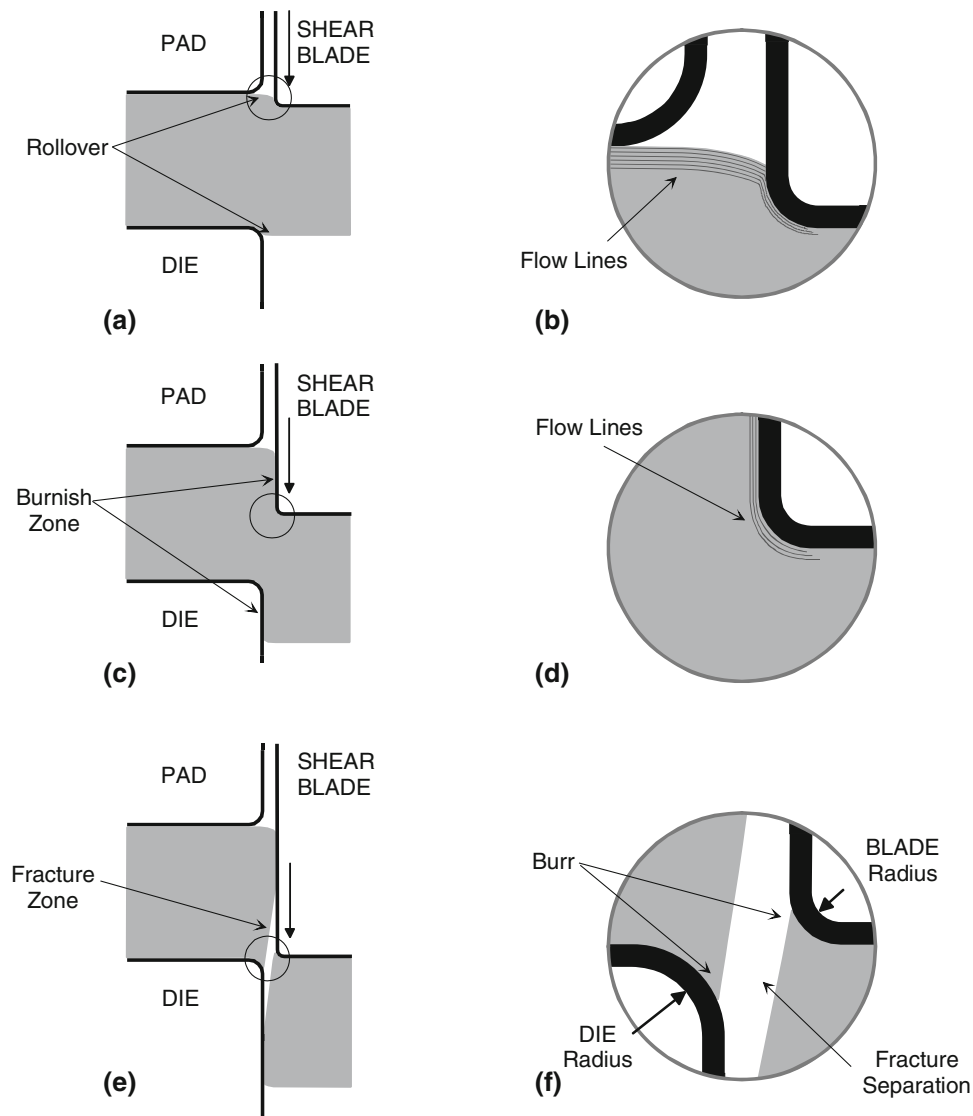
Schematic illustrating steps in the shearing process. (a) The rollover phase of shearing, (b) an expanded view of rollover with the flow lines indicated, (c) the burnishing phase of shearing, (d) expanded view of burnishing with the flow lines indicated (e) the fracture phase of shearing, and (f) an expanded view of the initiation of fracture and location of the burrs
